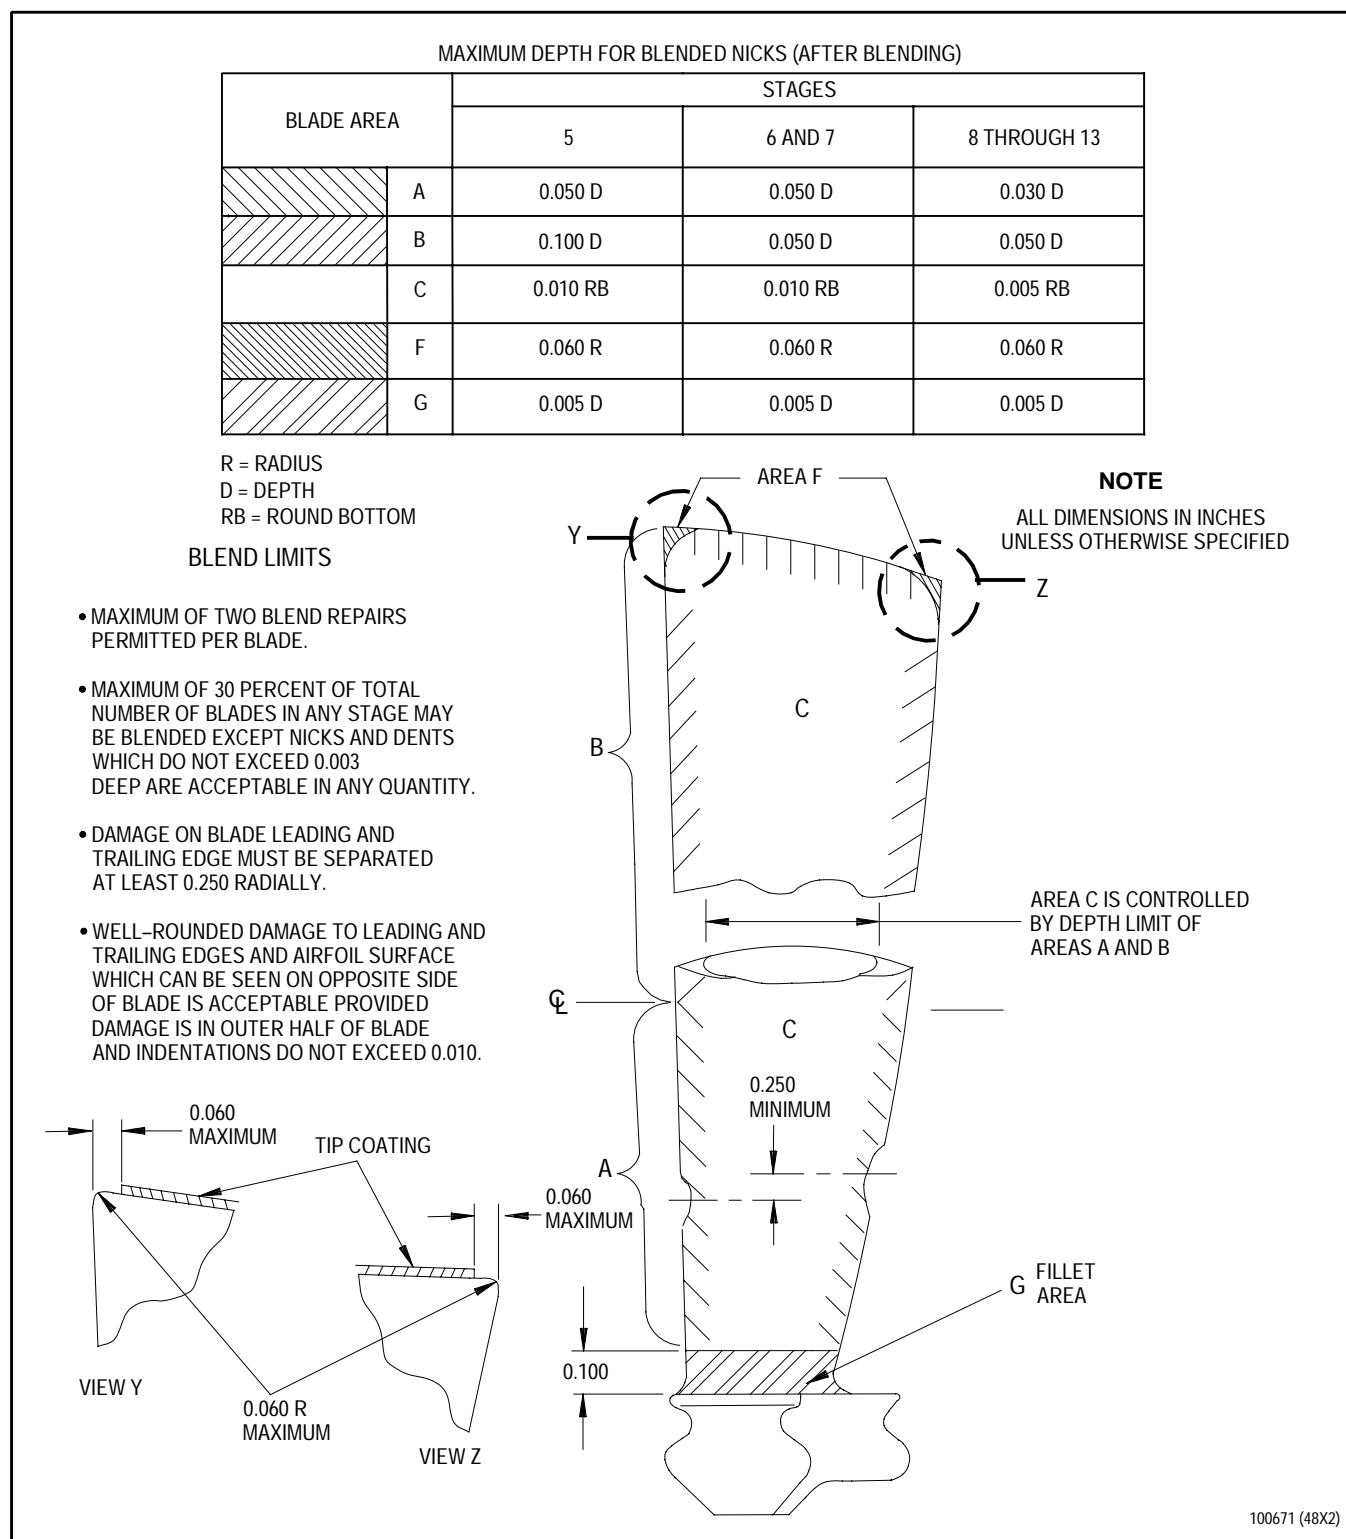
Fifth Through Thirteenth Stage Compressor Rotor Blades - Blend Limits
